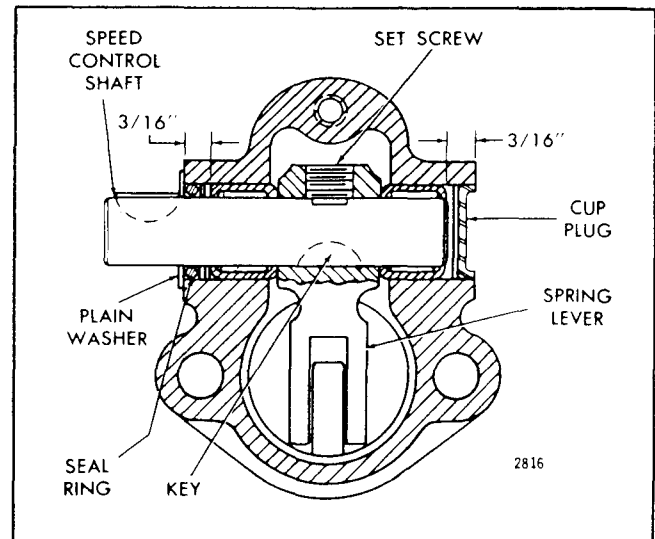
Cross Section of Governor Spring Housing and Lever Assembly
